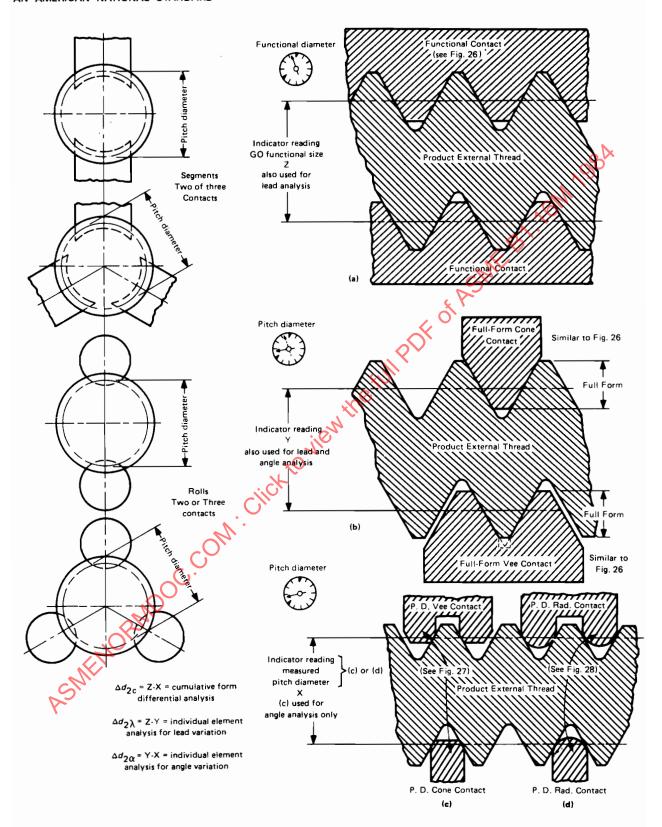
INDICATING THREAD GAGES - DIFFERENTIAL GAGING
